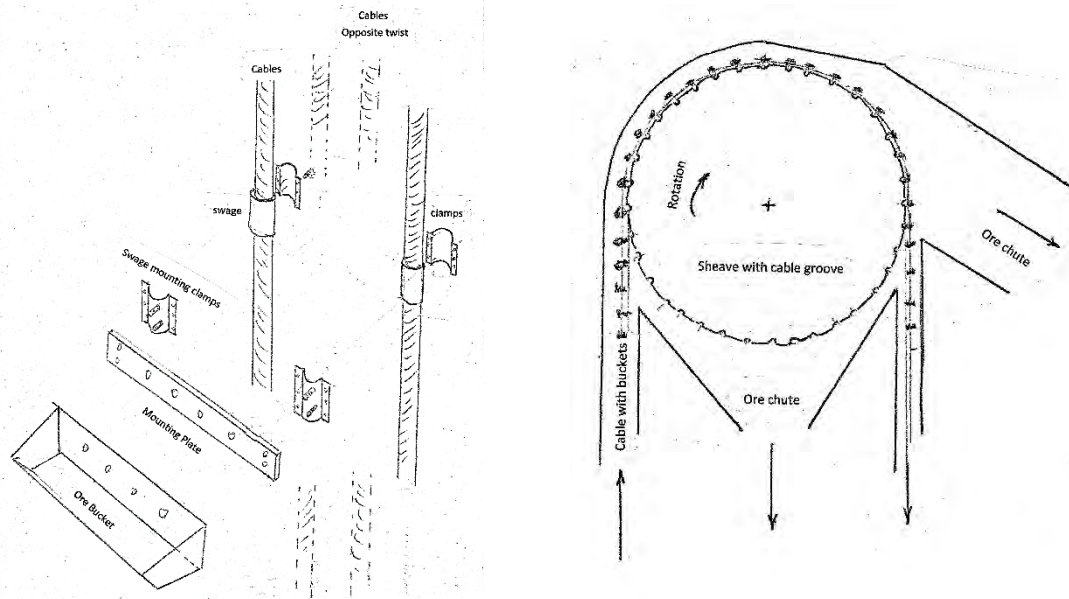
Twin cable elevator. Sketch of what components may appear like, with a geared friction drive
